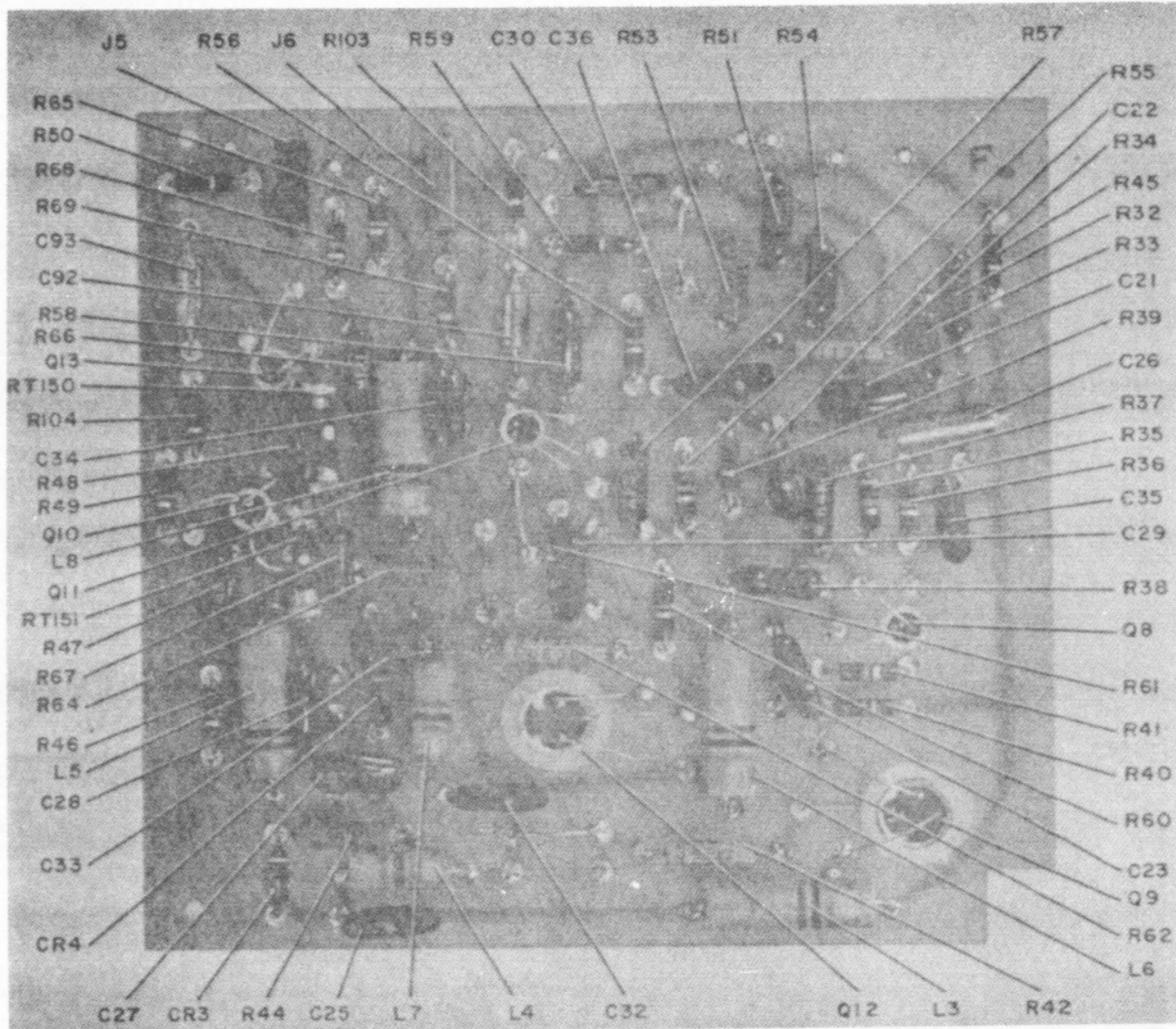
Oscillator Control C-4311/PRC-47 (A7). Card Assembly E2. Parts Location
